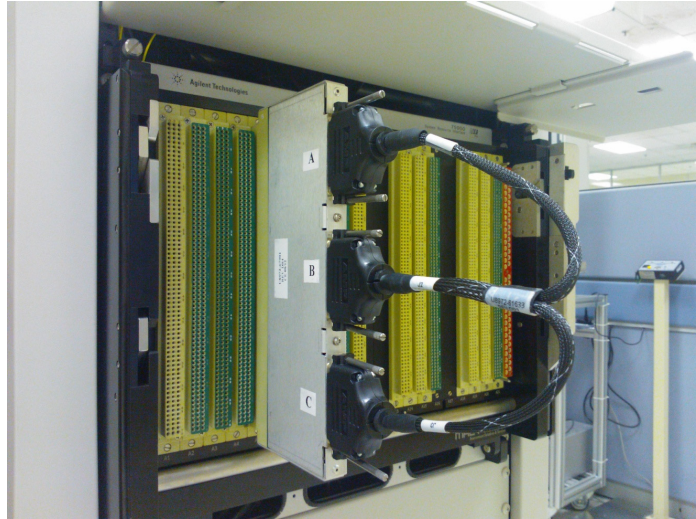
Installing two Universal CEDGN Test Fixtures U8972-67901 with a CEDGN HV-DAQ Cable U8972-61626
